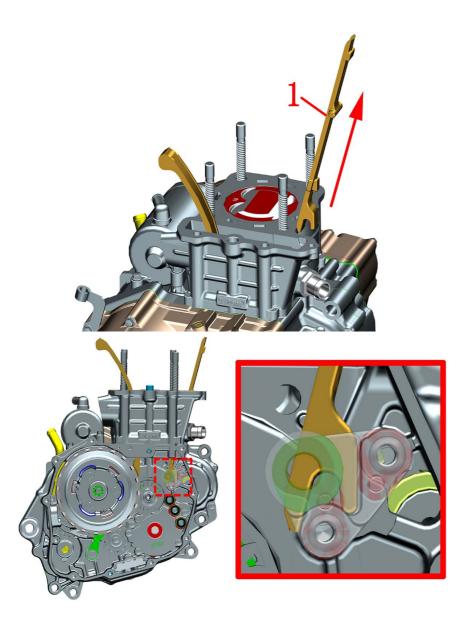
CYLINDER BLOCK		Disassembling the guide bar	CHK
